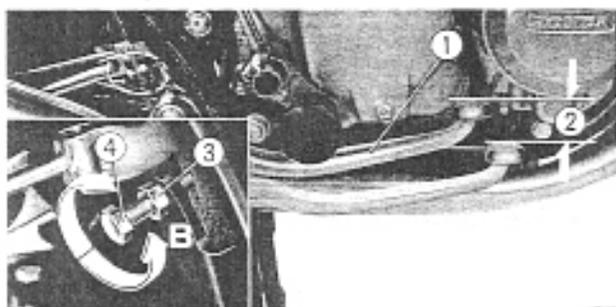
① Rear brake pedal ② Free travel ③ Lock nut ④ Adjusting bolt
